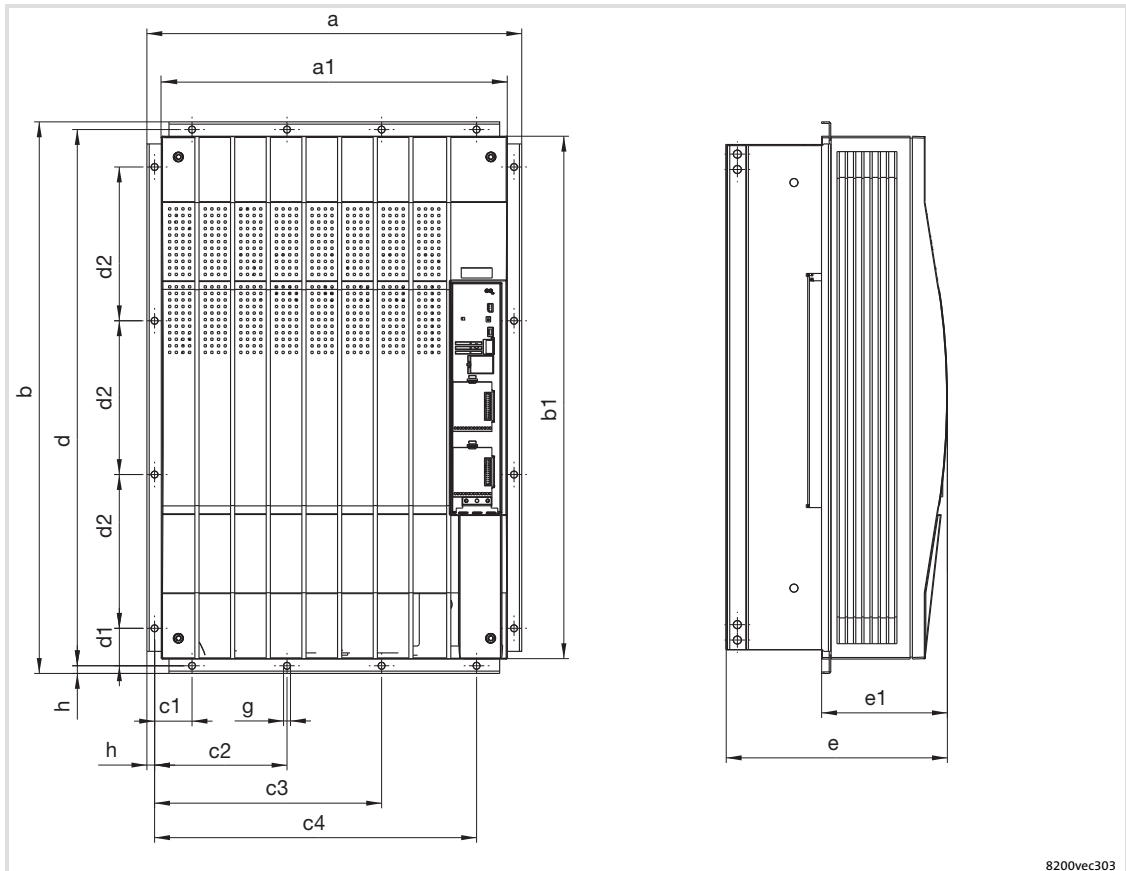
Dimensions for thermally separated mounting 75 ... 90 kW
